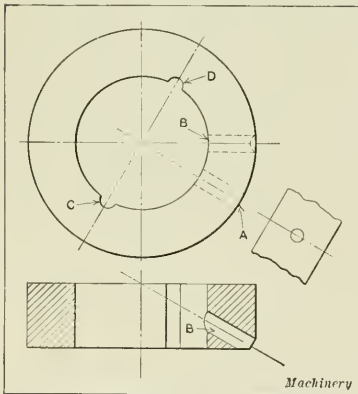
Master Gage for testing Gage shown in Fig. 4
